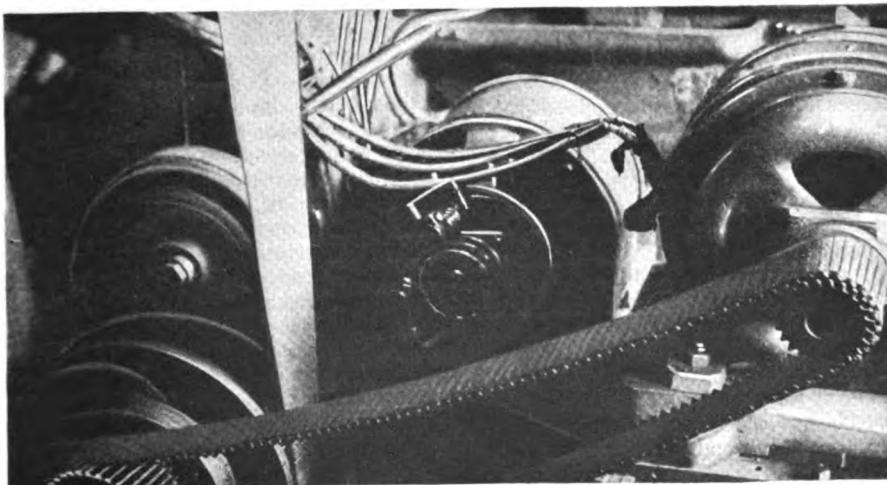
This shows how the driving motor and direct-current generator were mounted on the tank which was part of the grinder.
